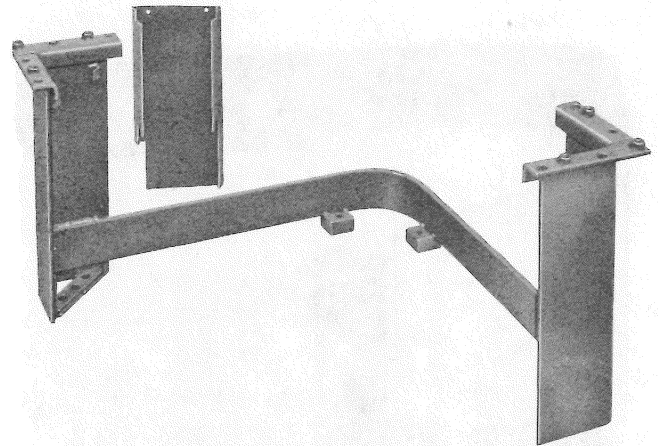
KS-20255, List 14 Surface Mount Leg and Cover Assembly
